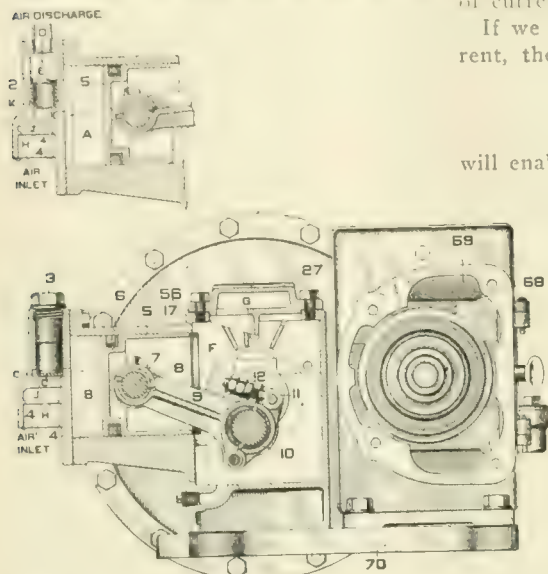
CROSS SECTION SHOWING PUMP PISTON.
